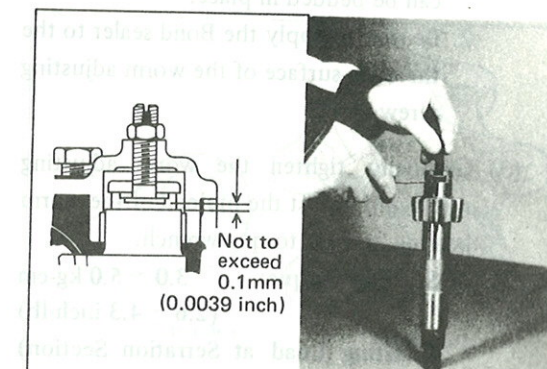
Measuring Sector Shaft Thrust Clearance
